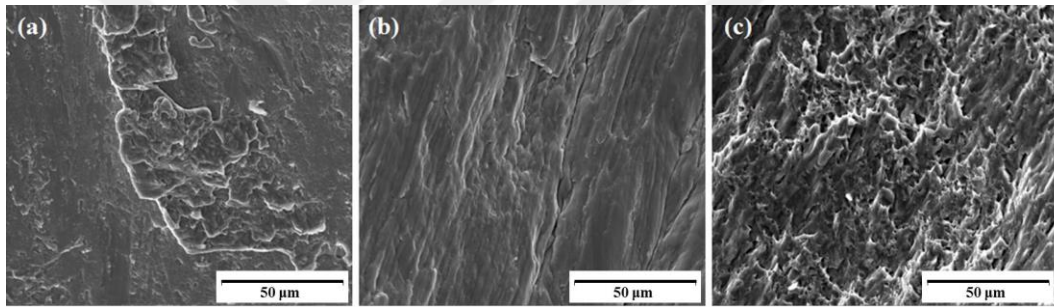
27: SEM images illustrating the tensile test fracture surfaces of SLM fabricated; (a) as-received, (b) THP-4 stepped, (c) THP-2 stepped samples.
